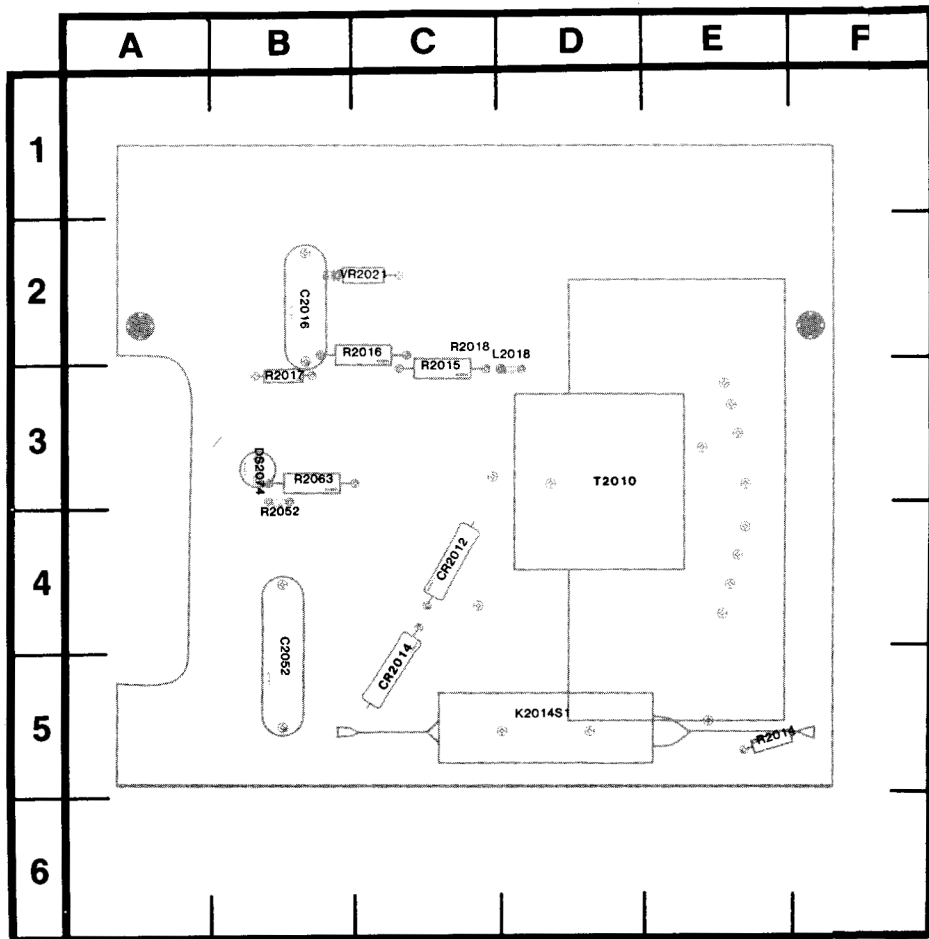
A22-High Voltage Circuit Board Assembly (front).
